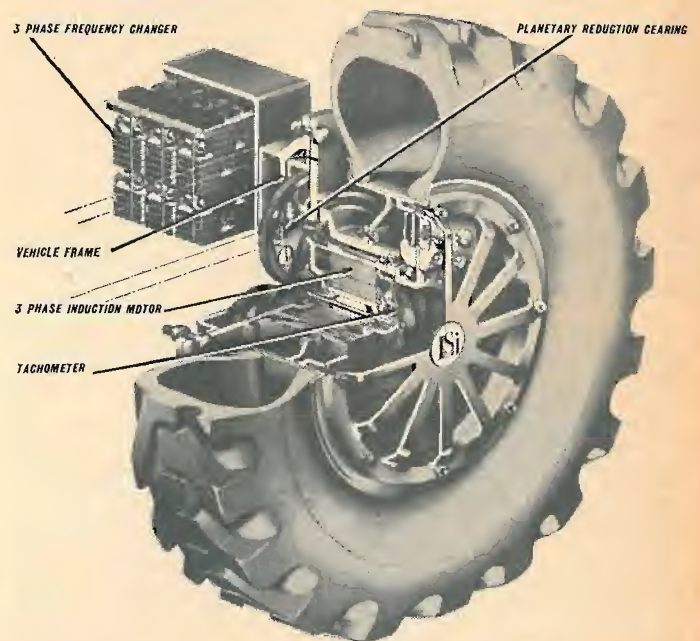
In the powered wheel, the drive motor and its associated gearing is located within the drive wheel itself.
